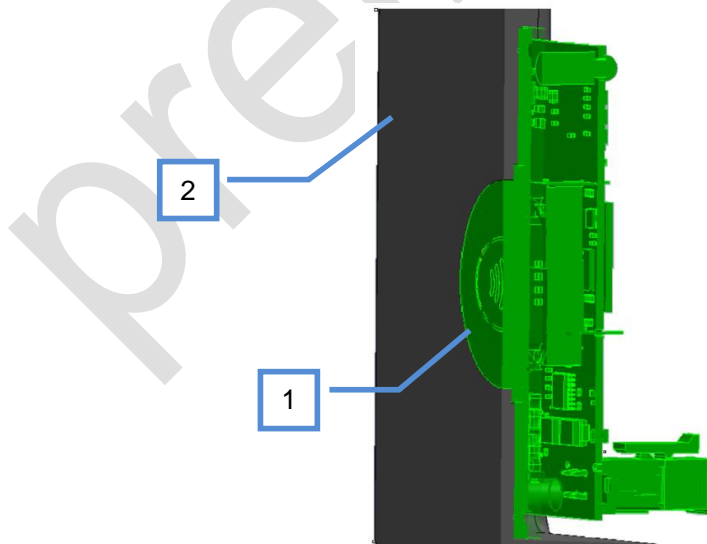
cVEND plug (1) installed in front plate (2) - cross-sectional view
